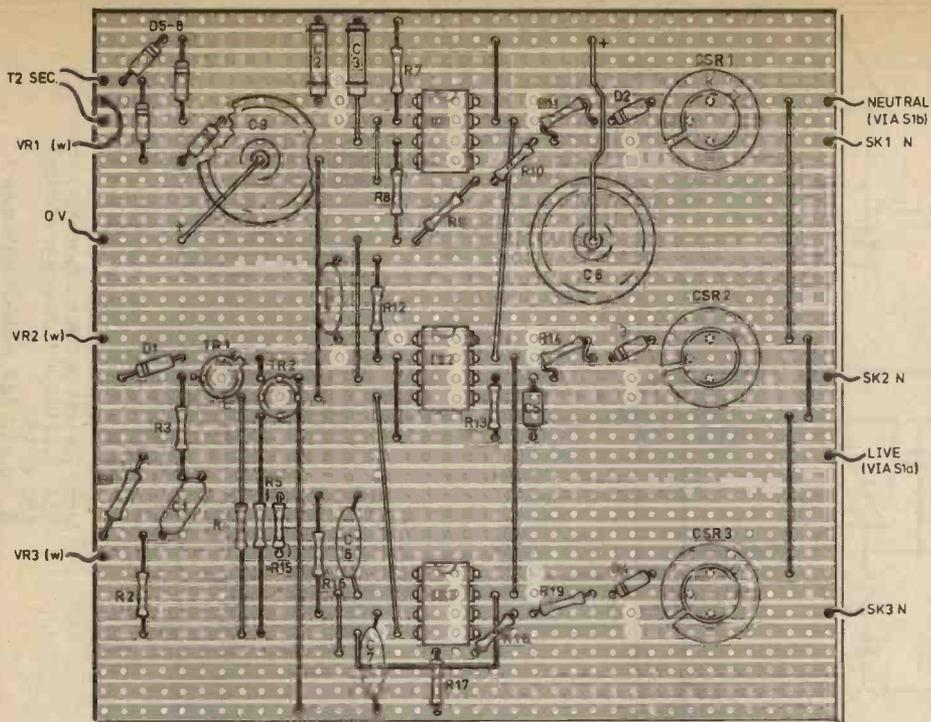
Component and wiring details of main board. The 0V line is not connected to chassis
